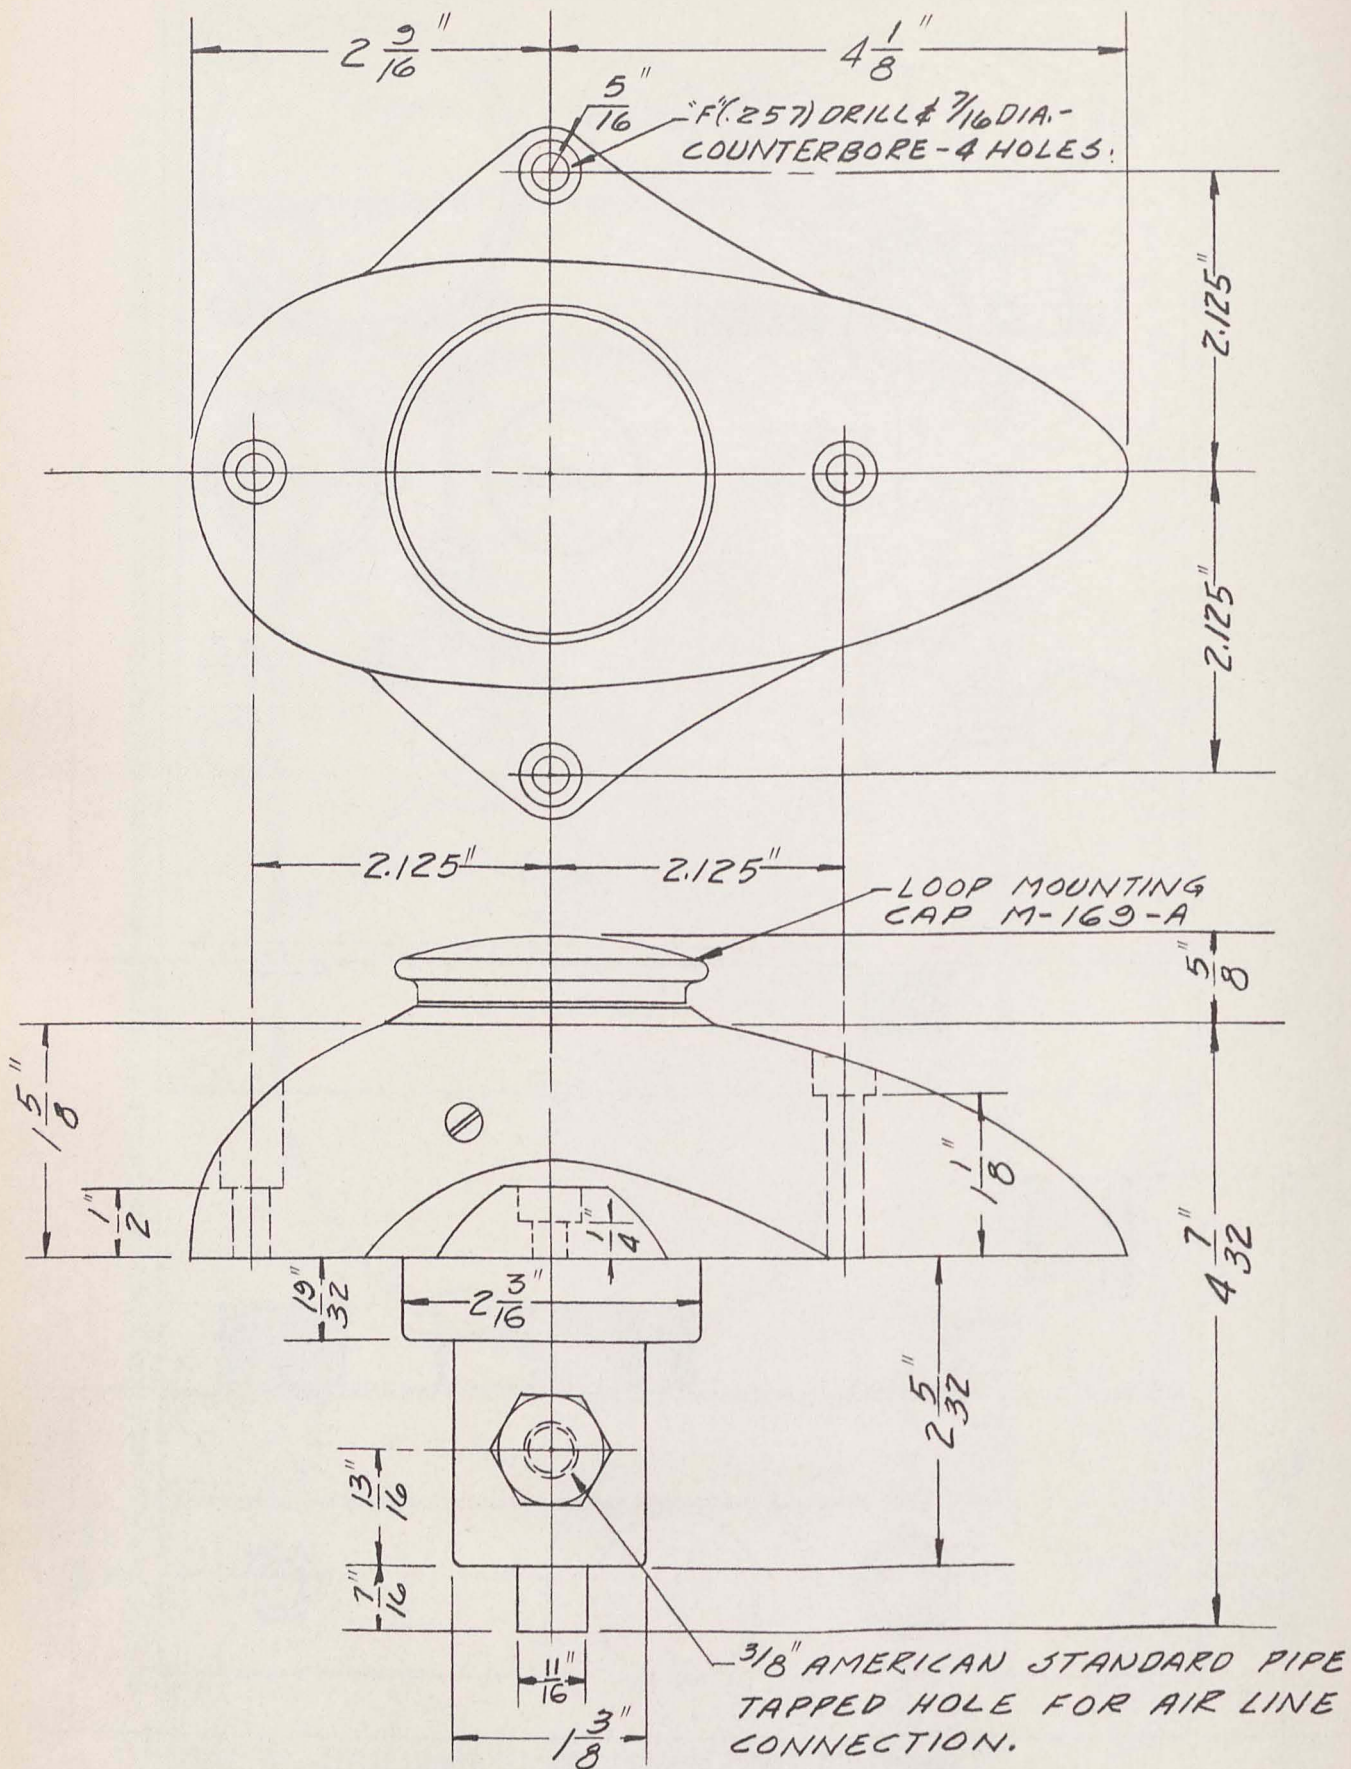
OUTLINE DRAWING—LOOP MOUNTING GS-7-B
